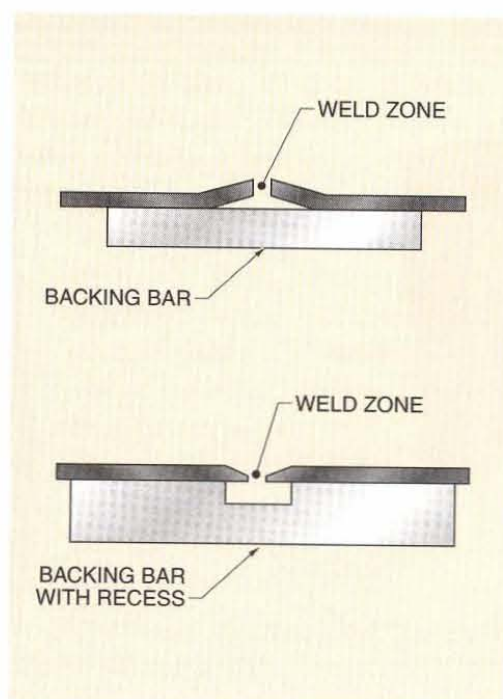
A backing bar should be positioned so that it does not touch the weld zone.
